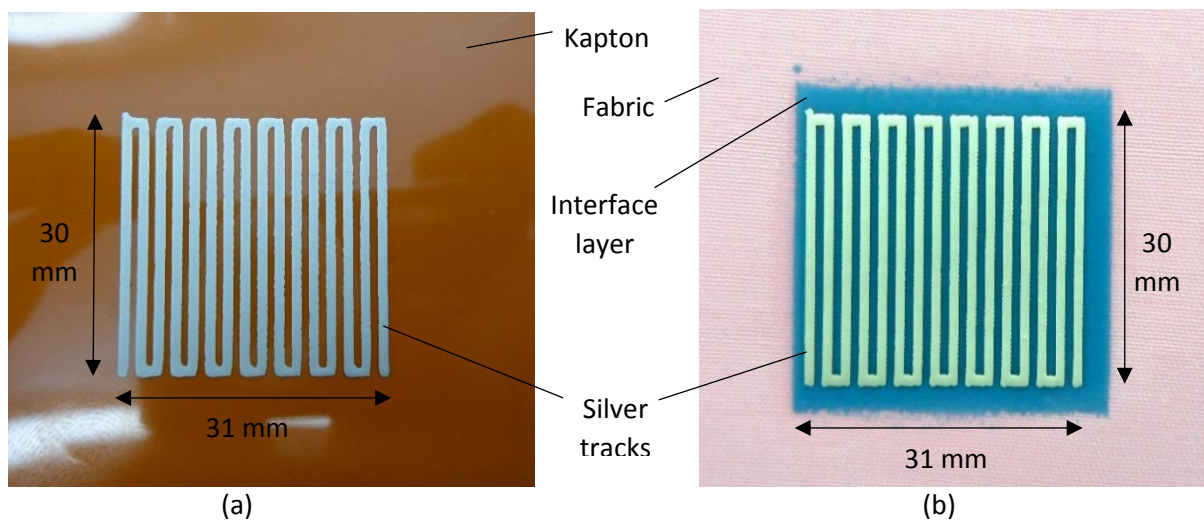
Dispenser printed test heaters printed on (a) Kapton and (b) interface layer on fabric
